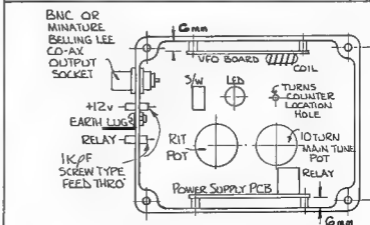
VFO/Power Supply. Placement of components and PCBs in 6908P DCB.
